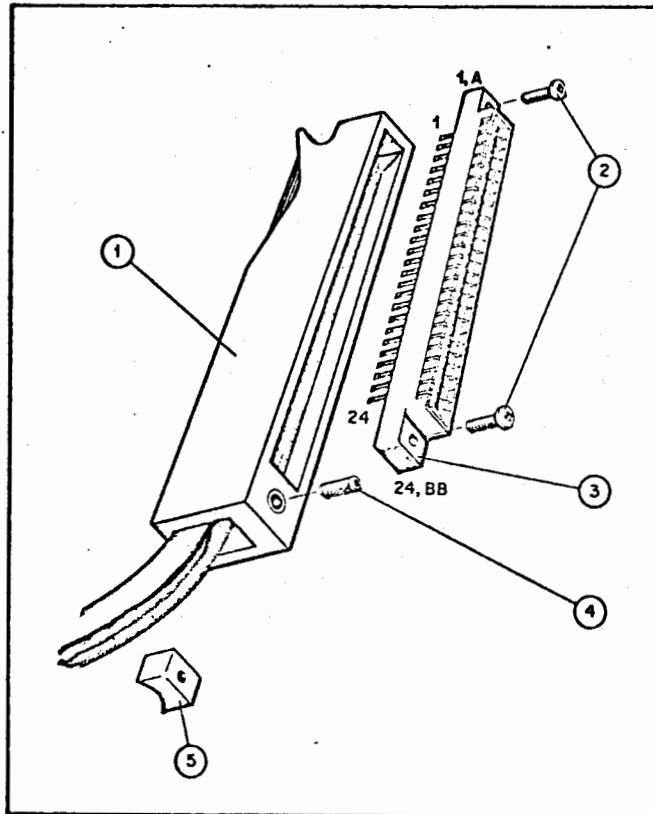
48-Pin Connector Kit Assembly Diagram
